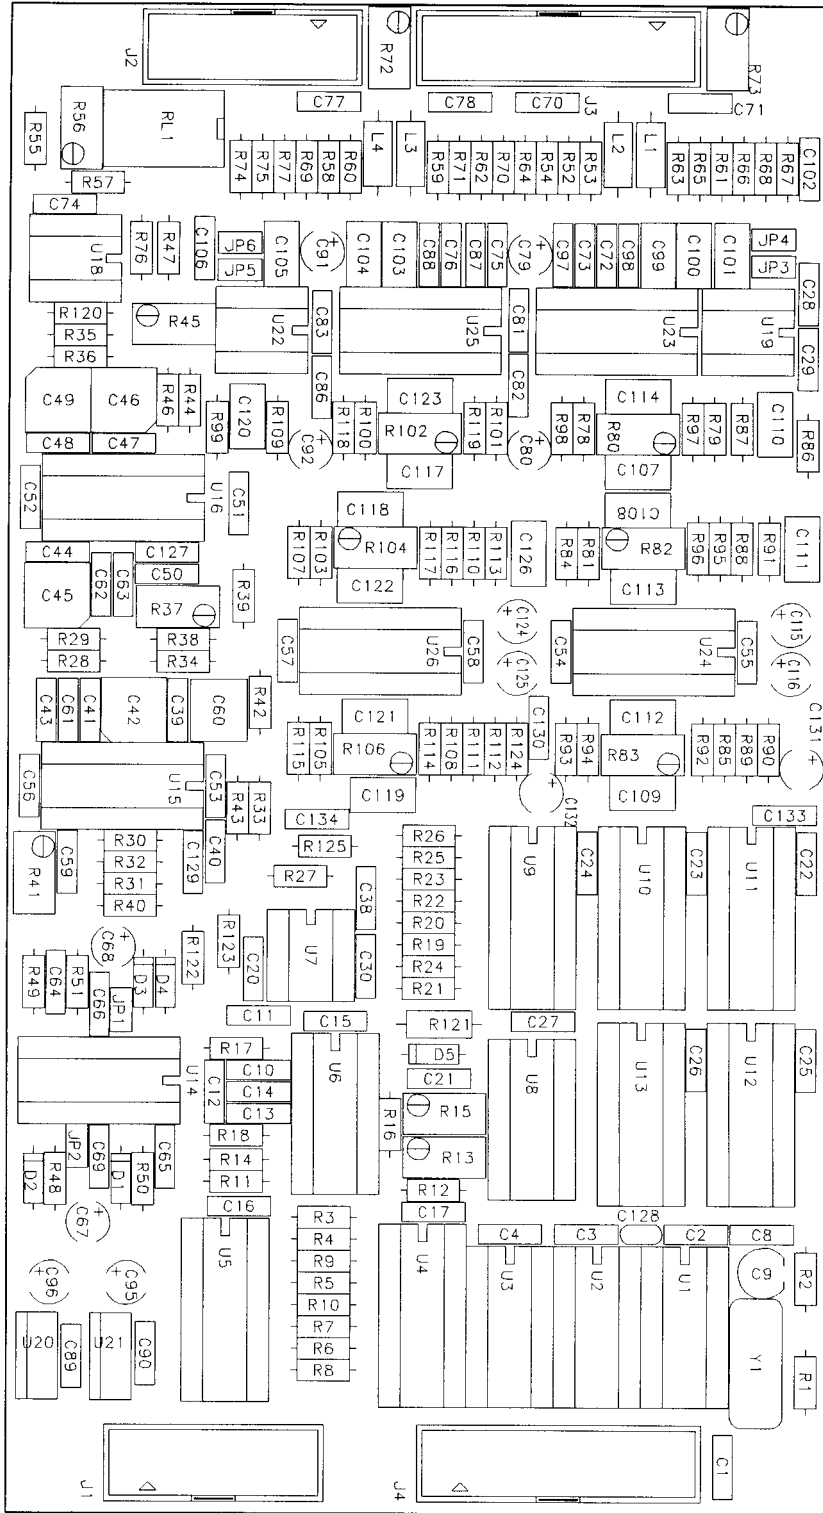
STEREO ENCODER COMPONENT LAYOUT (DB 9506-001)
